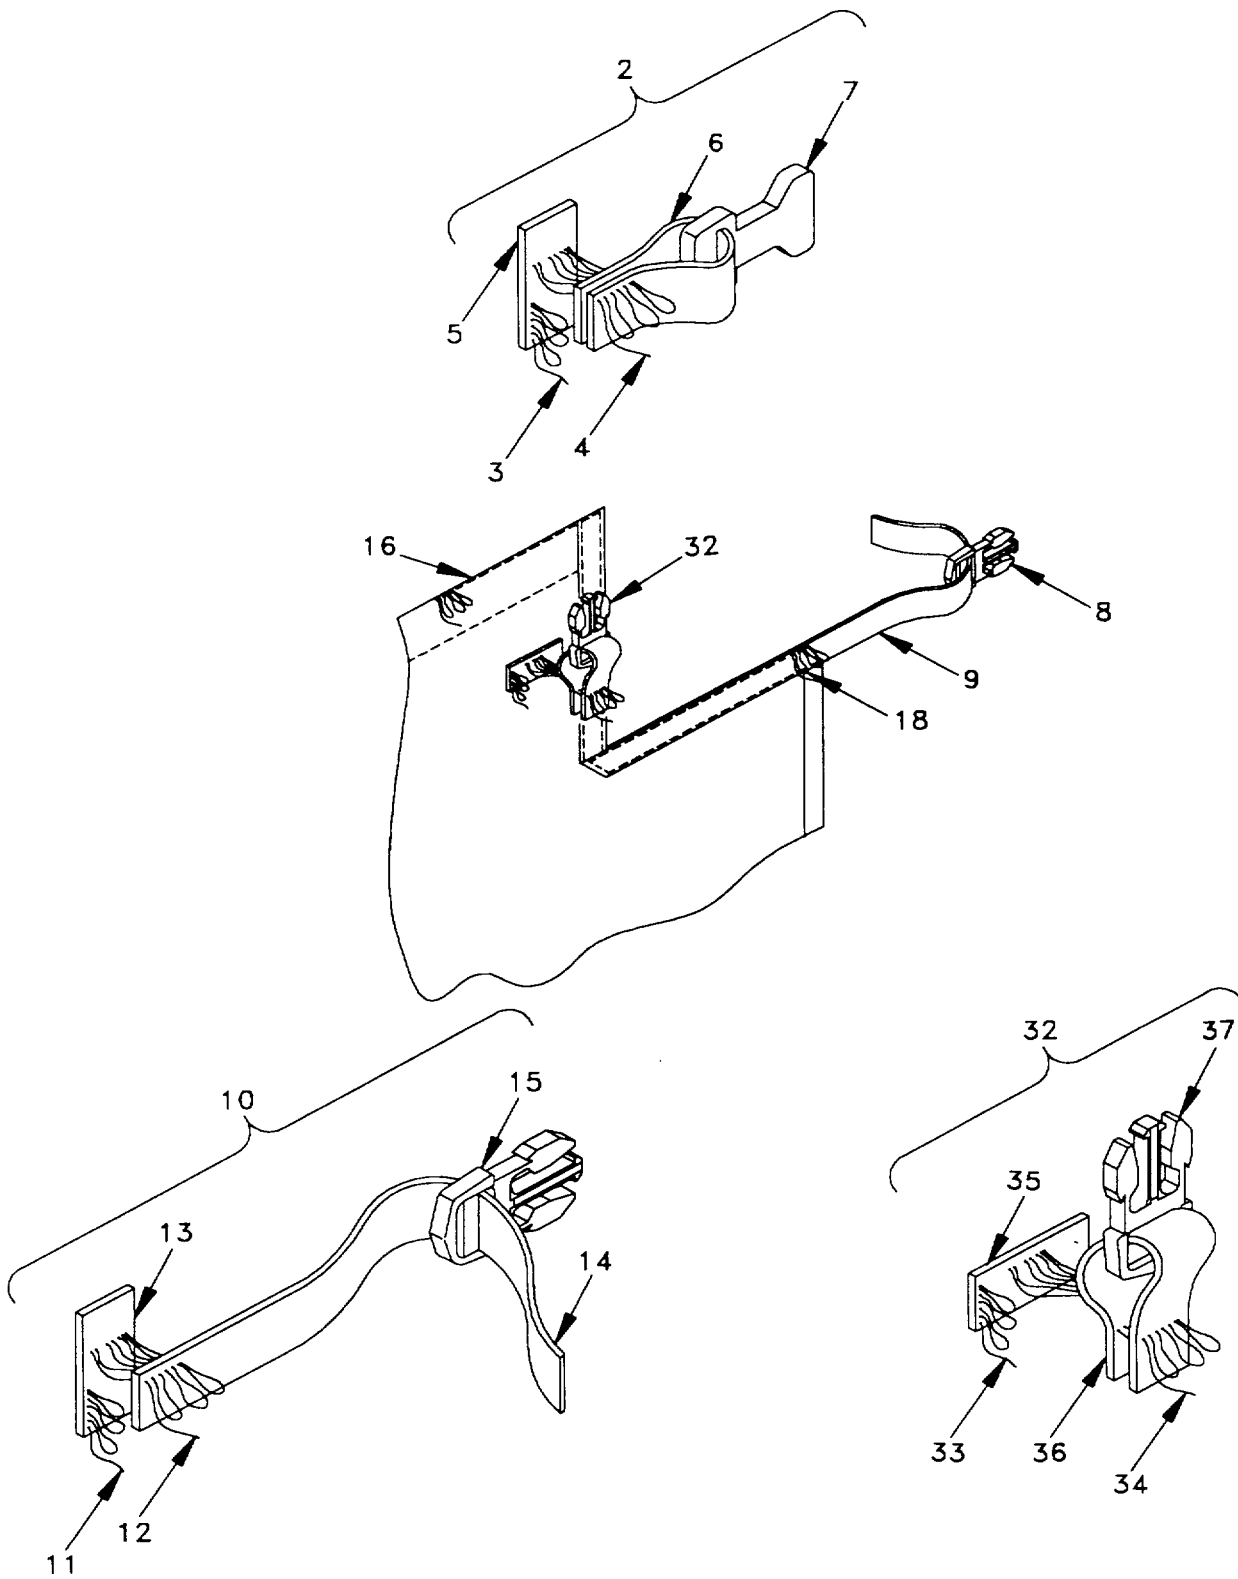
Entrance/Window Wall Liner Assembly (Sheet 2 of 2)
